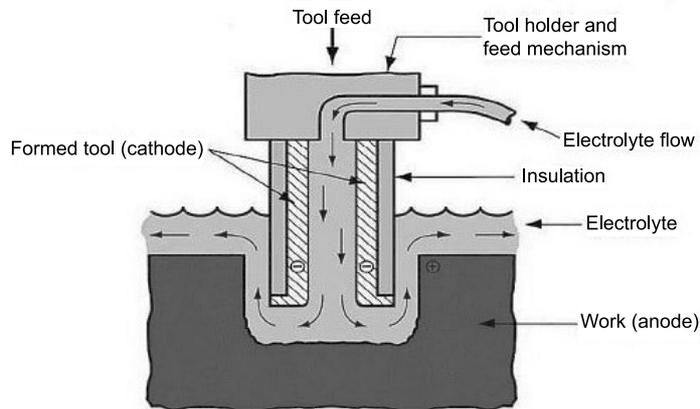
Electro Chemical Machining (source: machinemfg.com)
